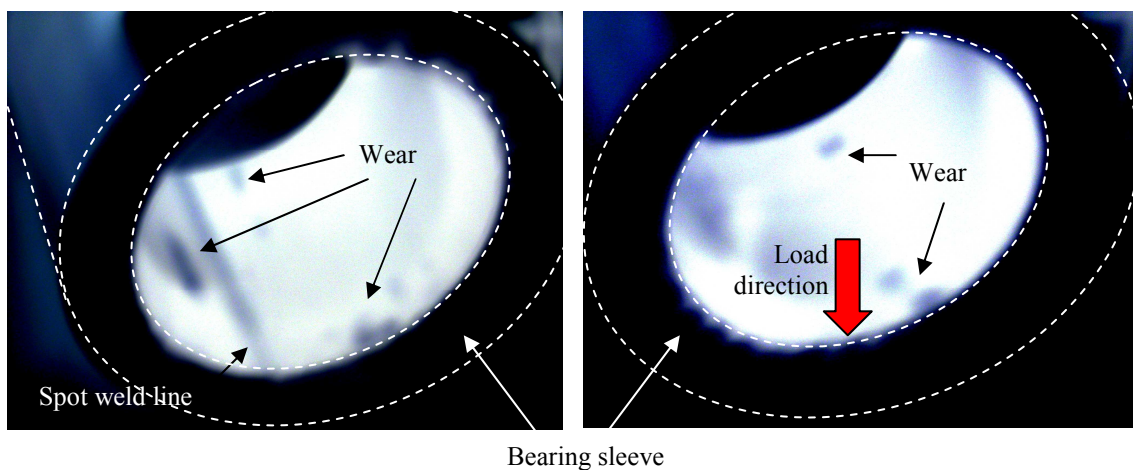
Test foil bearing surface condition after rotordynamic experiments
